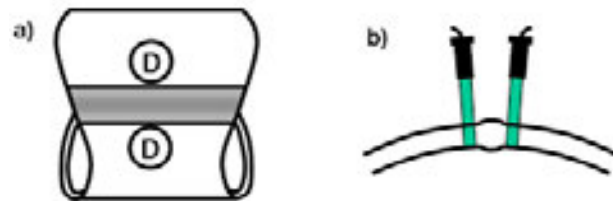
Lamination Testing within heat-affected zone. a) Top view of probe pair position with respect to the weld, b) cross-sectional view of probe pair and pipe.
